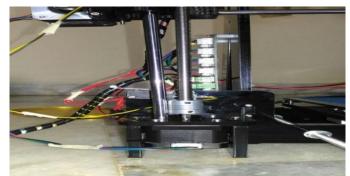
Shows the Z-axis motor assembly (bottom) fixed to the side frame and the figure also shows the Z-axis limit switch
